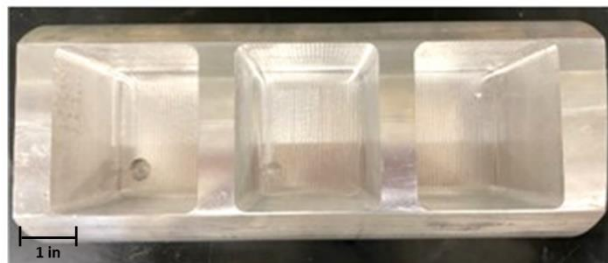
Photograph of the empty machined aluminum sample holder.
